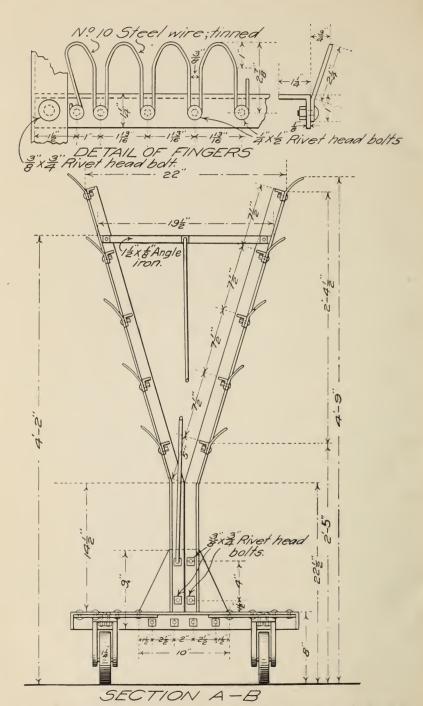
Working drawing of angle-iron cooling rack to hold 100 fowls. Section A-B.
